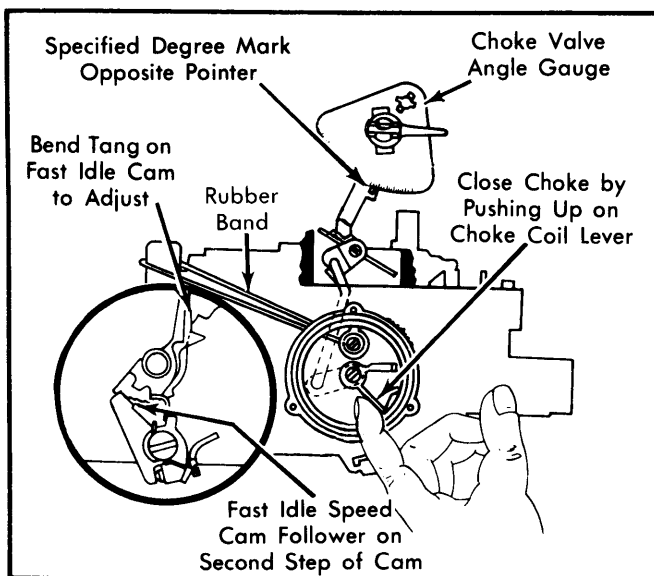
Adjusting Choke Rod (Fast Idle Cam)
